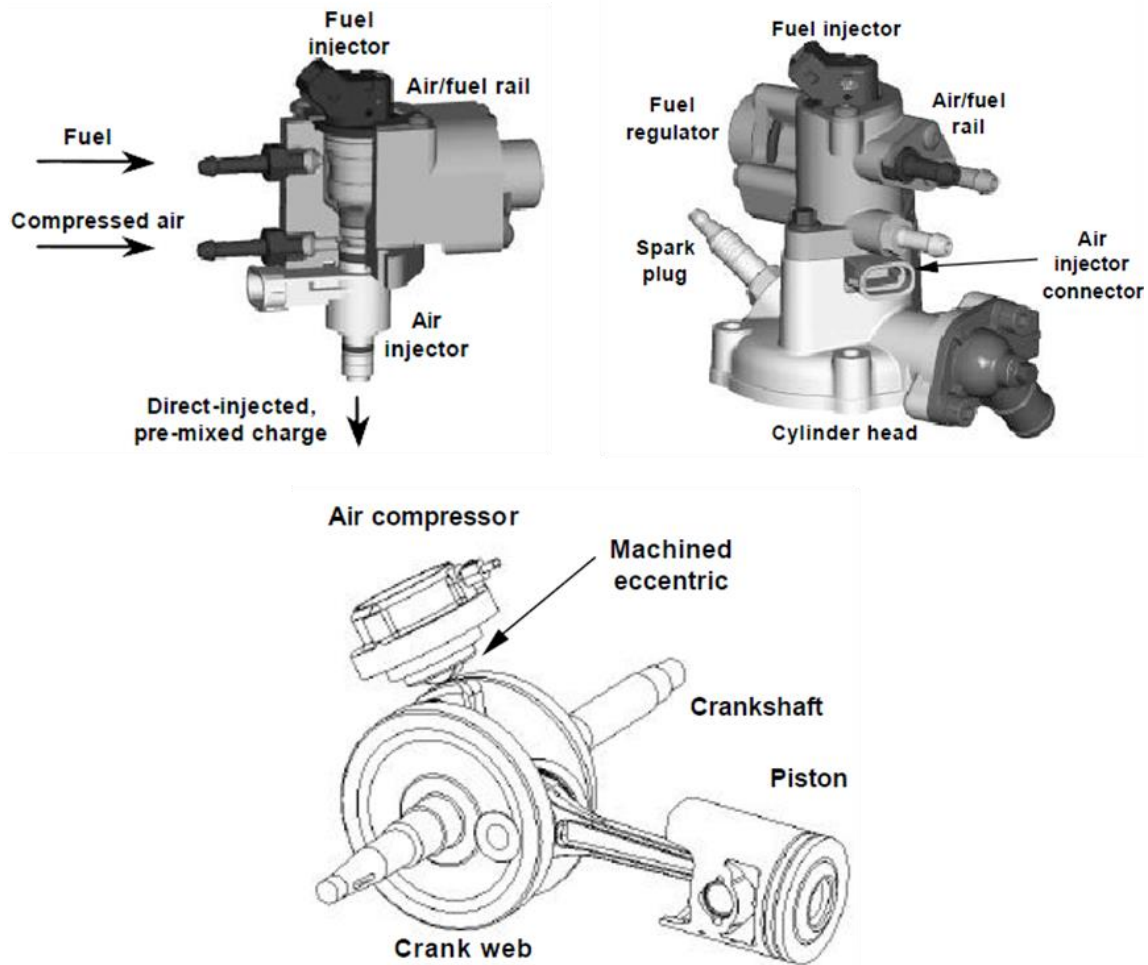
Synerject aSDI – injector unit including mounting position on the cylinder head (above) and air compressor drive (below) [97, pp. 9, 11]
